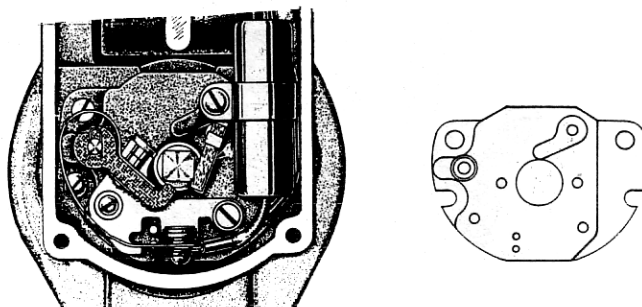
Bearing Support with and without Point Set, Condenser and Cam Wick
